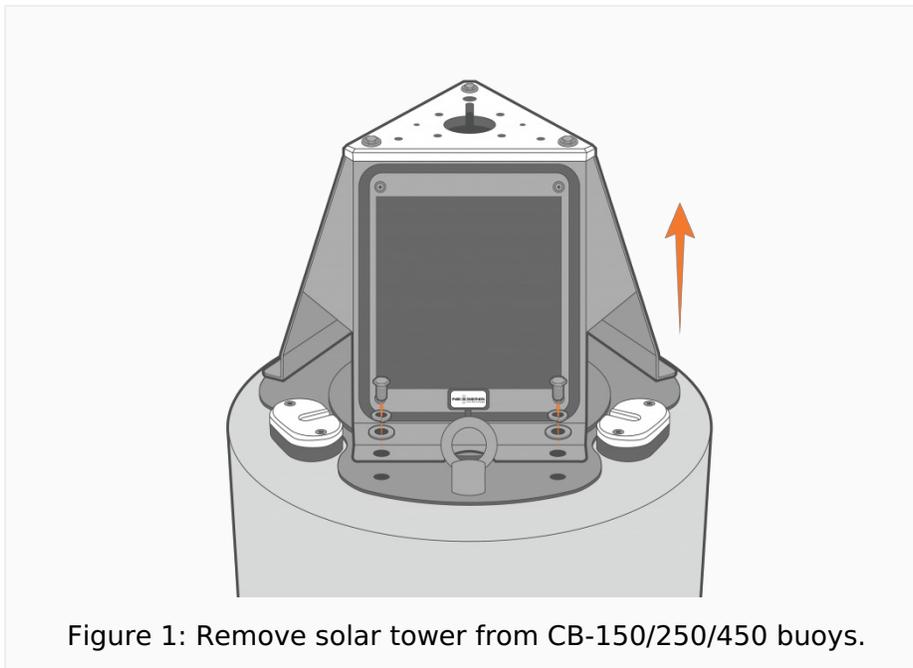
Remove solar tower from CB-150/250/450 buoys.
